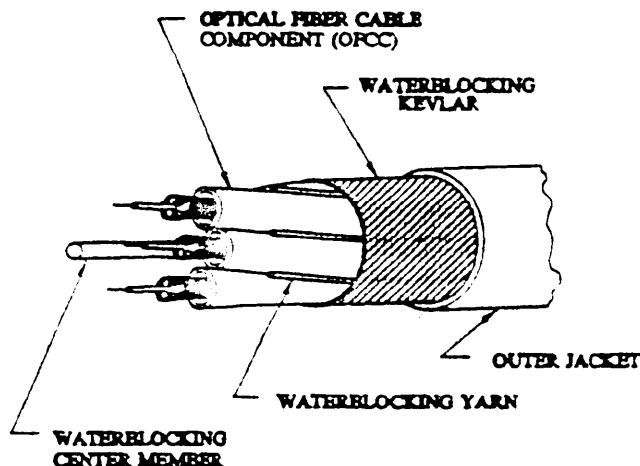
OFCC (Breakout) design fiber optic cable.
